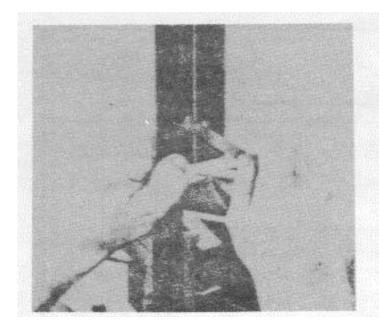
Checking alignment of post to lower saw guide keeper block by means of a straight edge and feeler gage.
